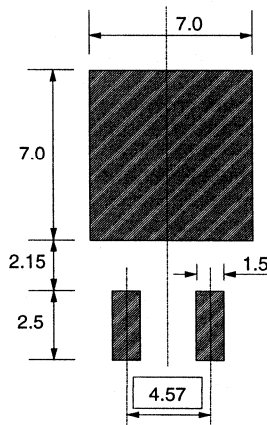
SOT428 : minimum pad sizes for surface mounting.
